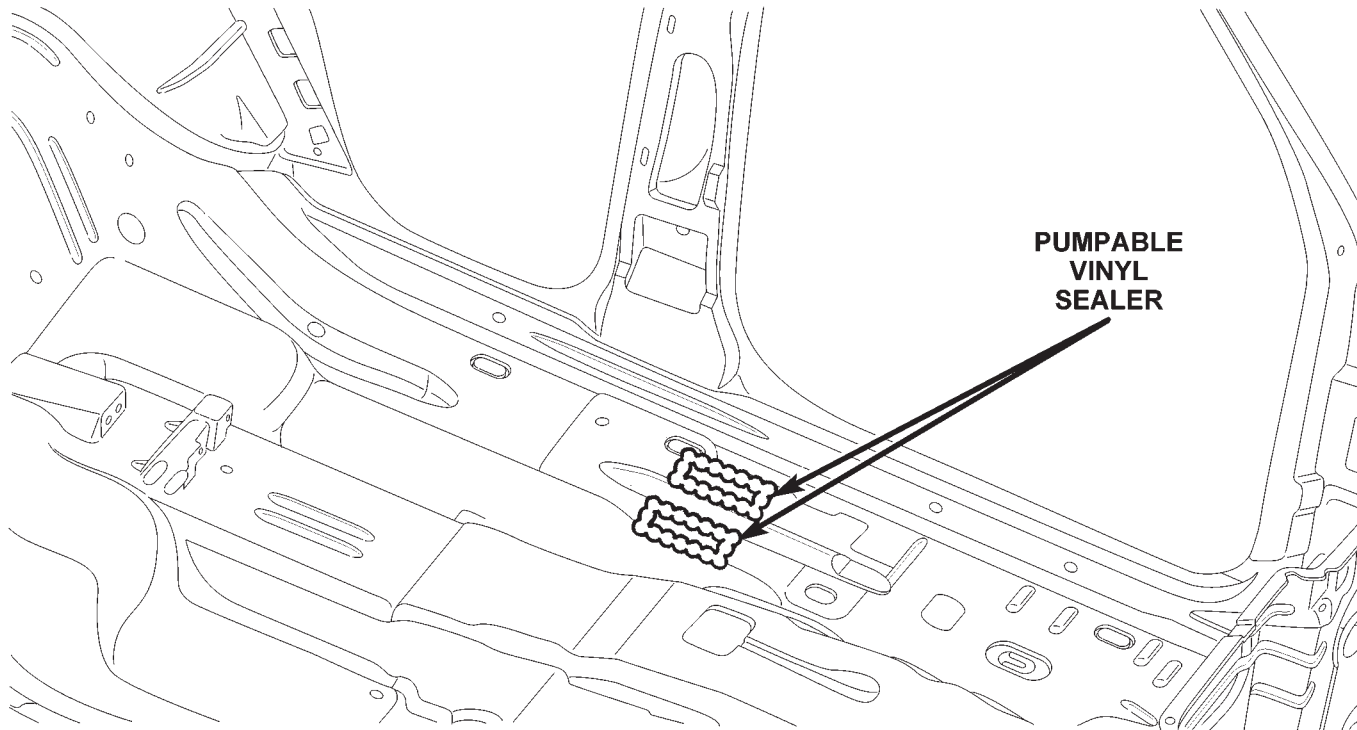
FLOOR PAN/SILL AND PARKING BRAKE
